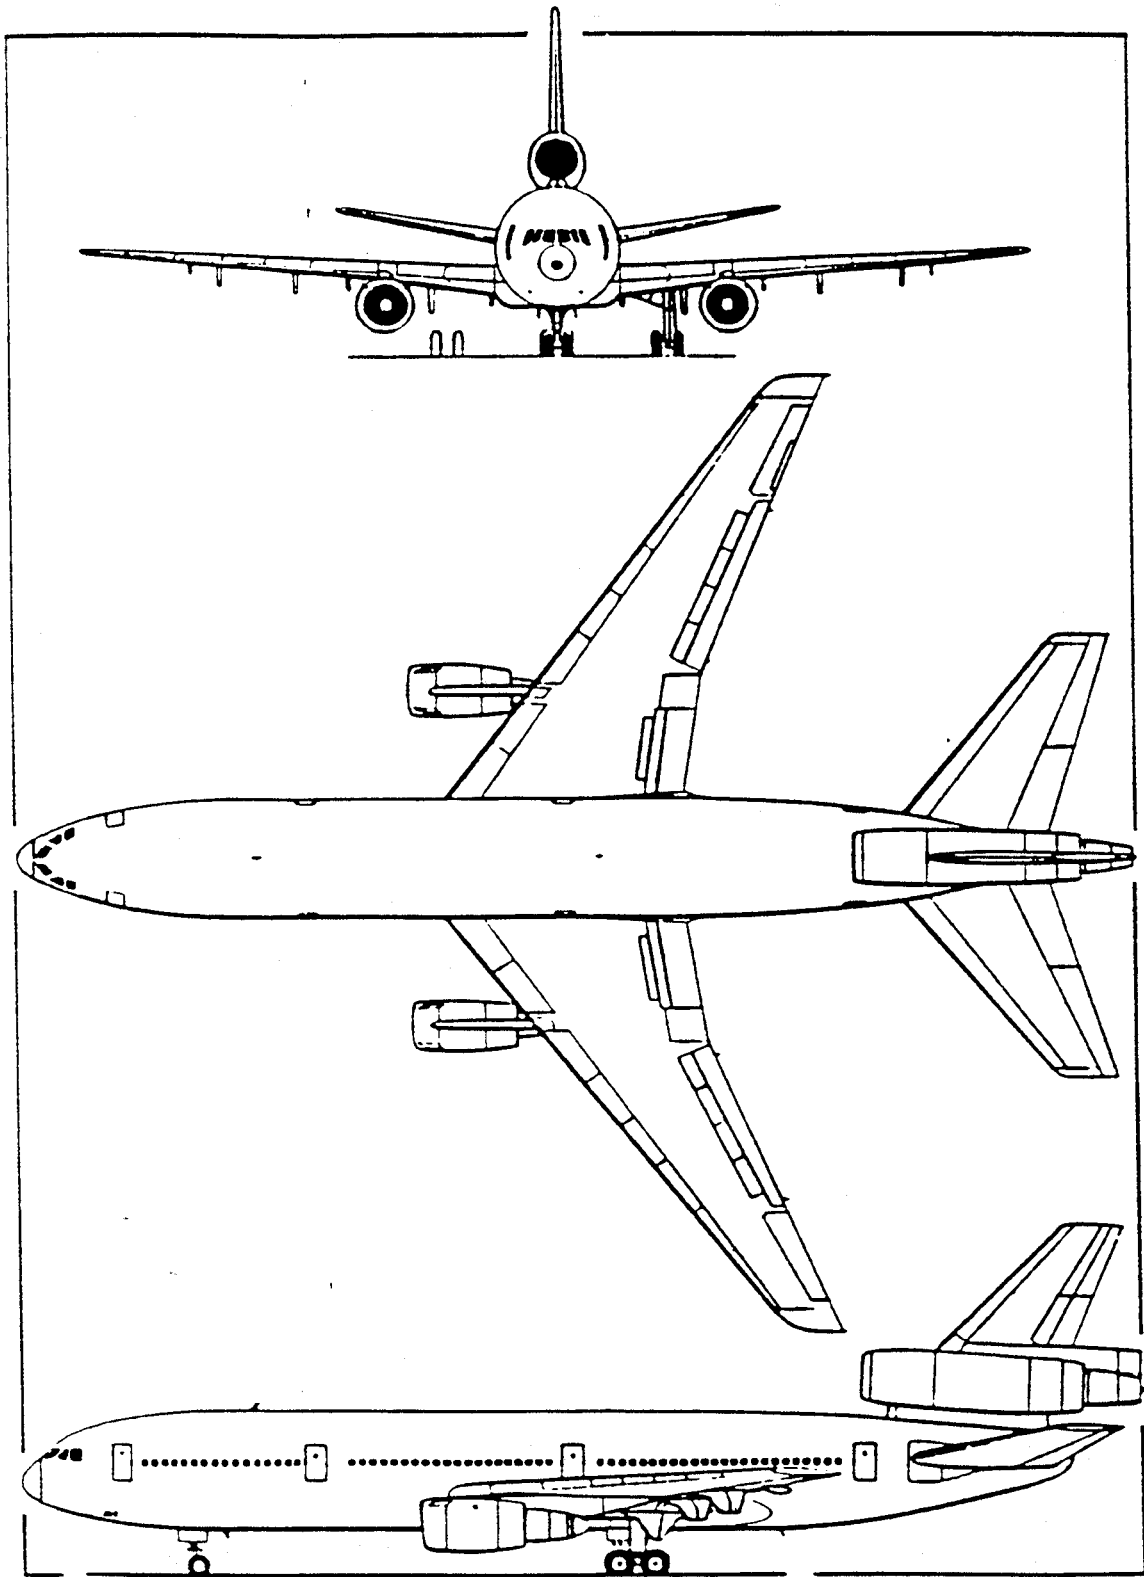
DC-10 CUTAWAY/THREE-VIEW DRAWING
